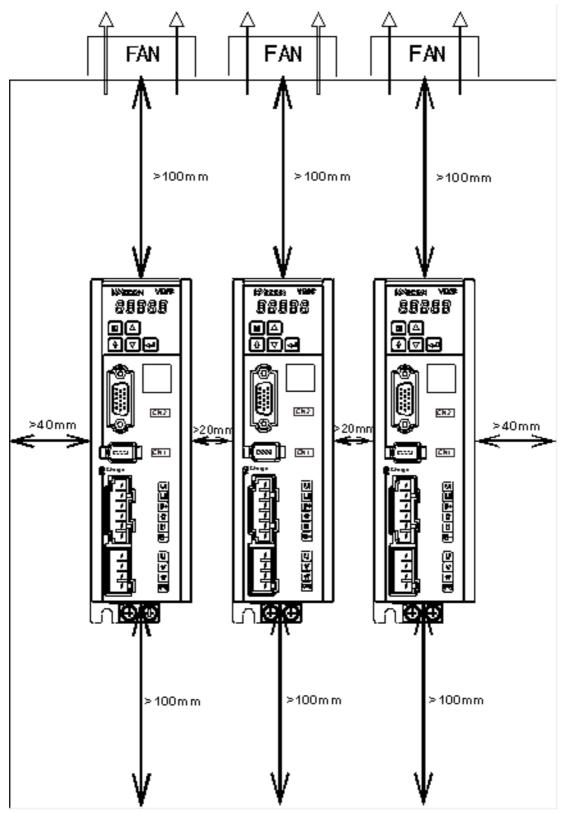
Parallel installation dimensions of multiple VD2F drives
